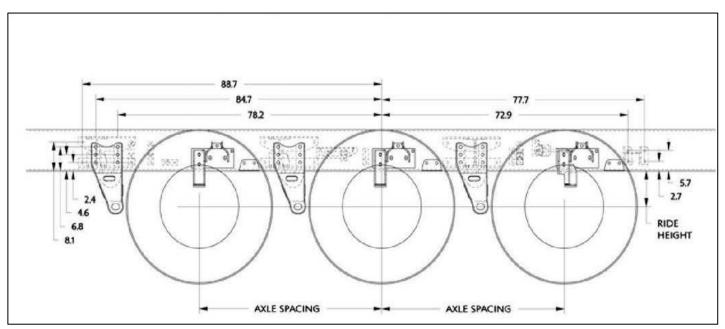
Neway ADZ 369/378 Frame Drilling (Dimensions In Millimeters)
